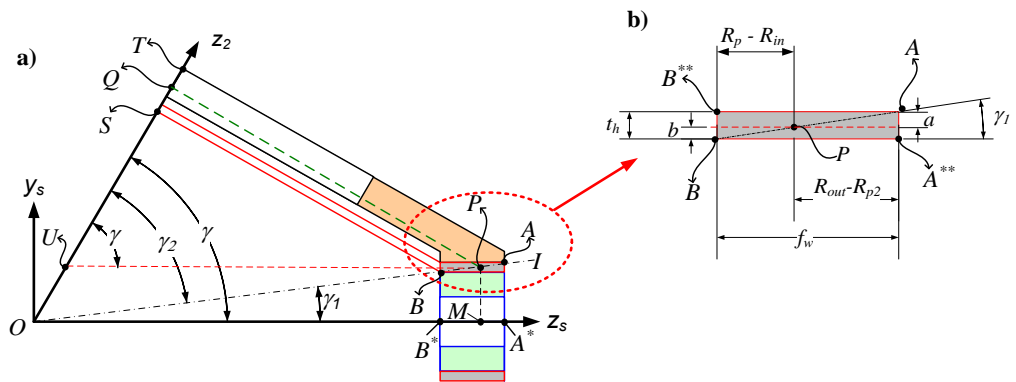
a) Face-gear & spur shaper relations and b) shaper tooth dimensions
